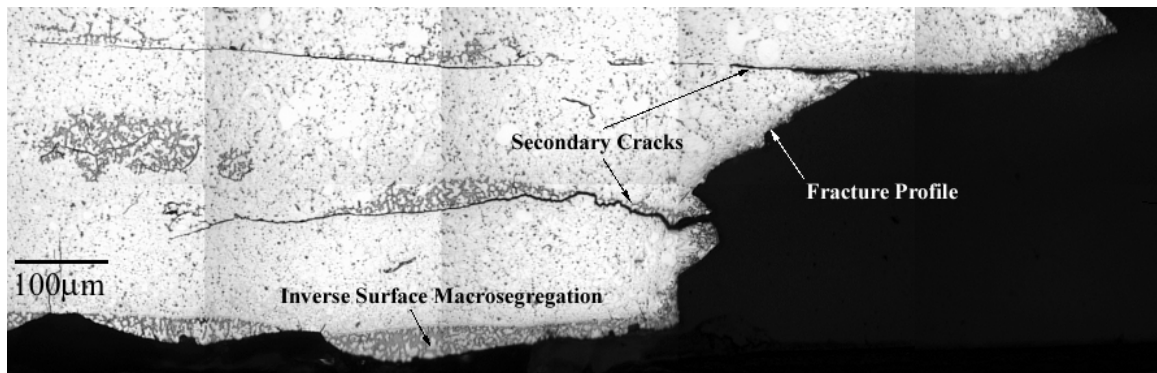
Metallographic section through a fatigue specimen from B-plate. The fracture profile is on the right hand side. Observe the secondary cracks at the boundaries of inverse macrosegregation regions just below fracture surface. The inverse surface macrosegregation is also clearly revealed at the bottom surface of the specimen.
